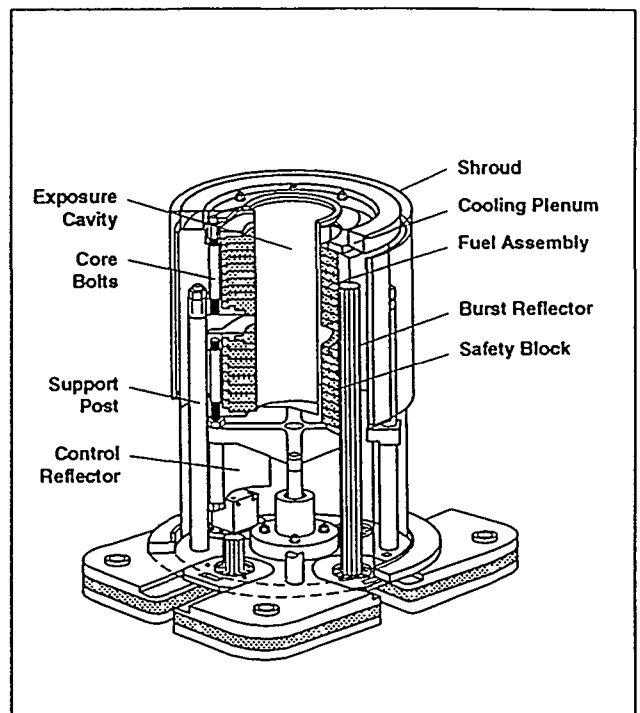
Cutaway view of the SPR-III fuel assembly and shroud.
